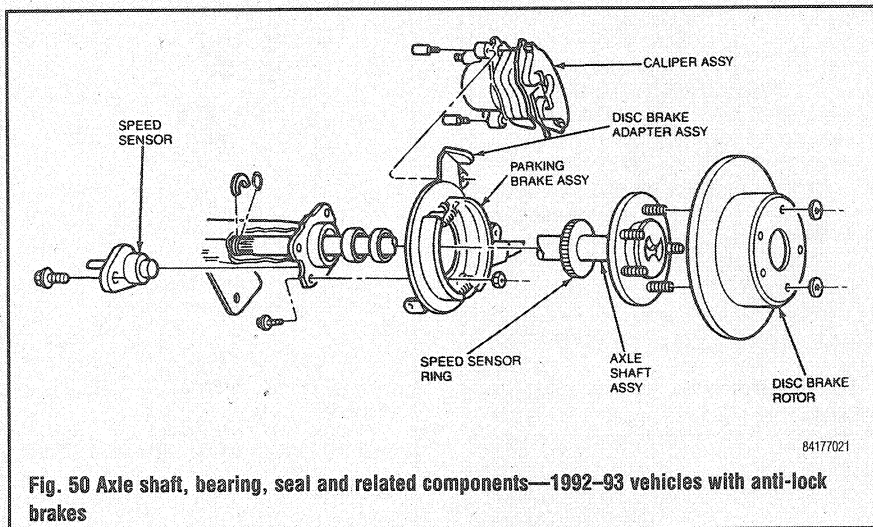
Axle shaft, bearing, seal and related components—1992-93 vehicles with anti-lock brakes
